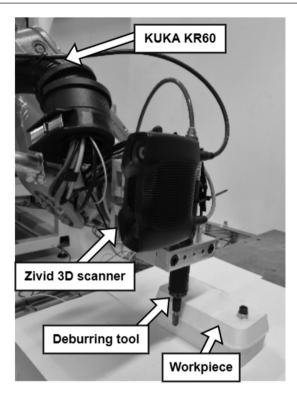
Experimental setup for robotic deburring. The setup includes a KUKA KR60 robot manipulator, a Zivid Two 3D scanner, a deburring tool, and the mounted workpiece.
